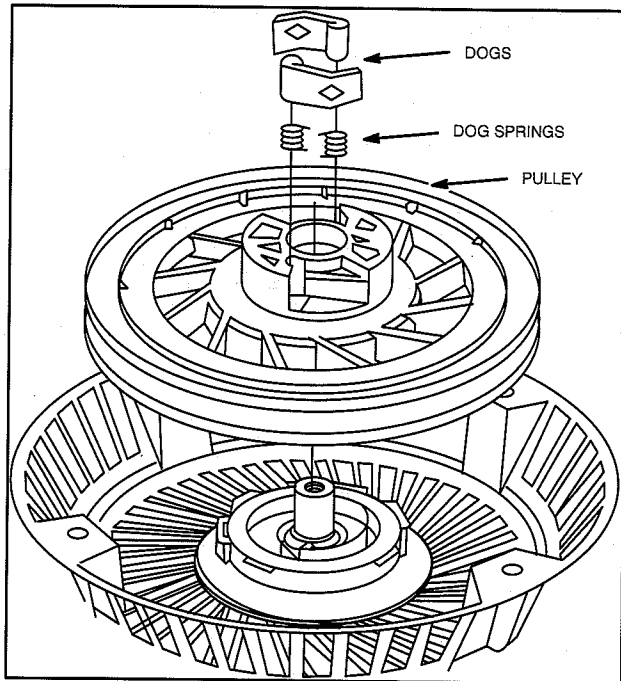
Removing Dogs, Dog Springs, and Pulley
